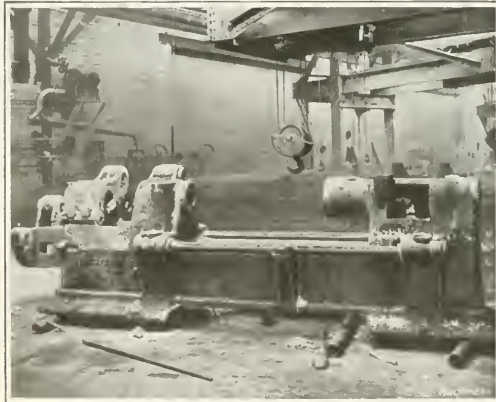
Finished Lathe Bed as it appeared immediately after Removal of Assembling Jig
